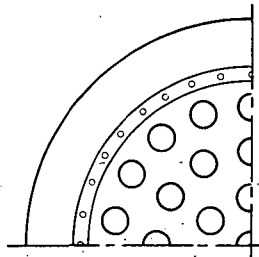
37-Element injector with removable film coolant ring manifold.
